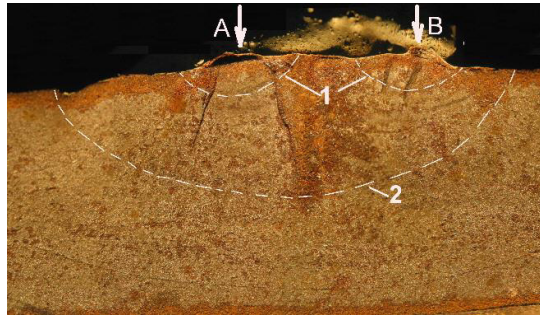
Merged early fatigue cracks 1, points A and B, in a dominant crack 2.
